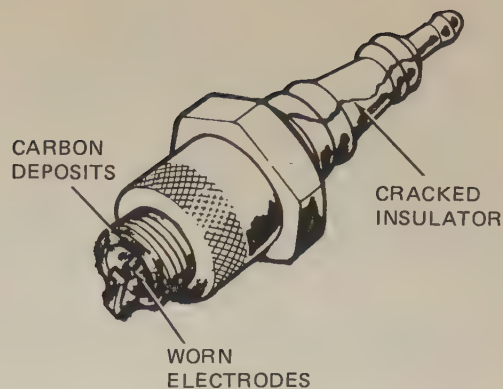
Defective spark plug showing cracks, carbon deposits, and worn electrodes. (Lawn Boy Division of Outboard Marine Corporation)
